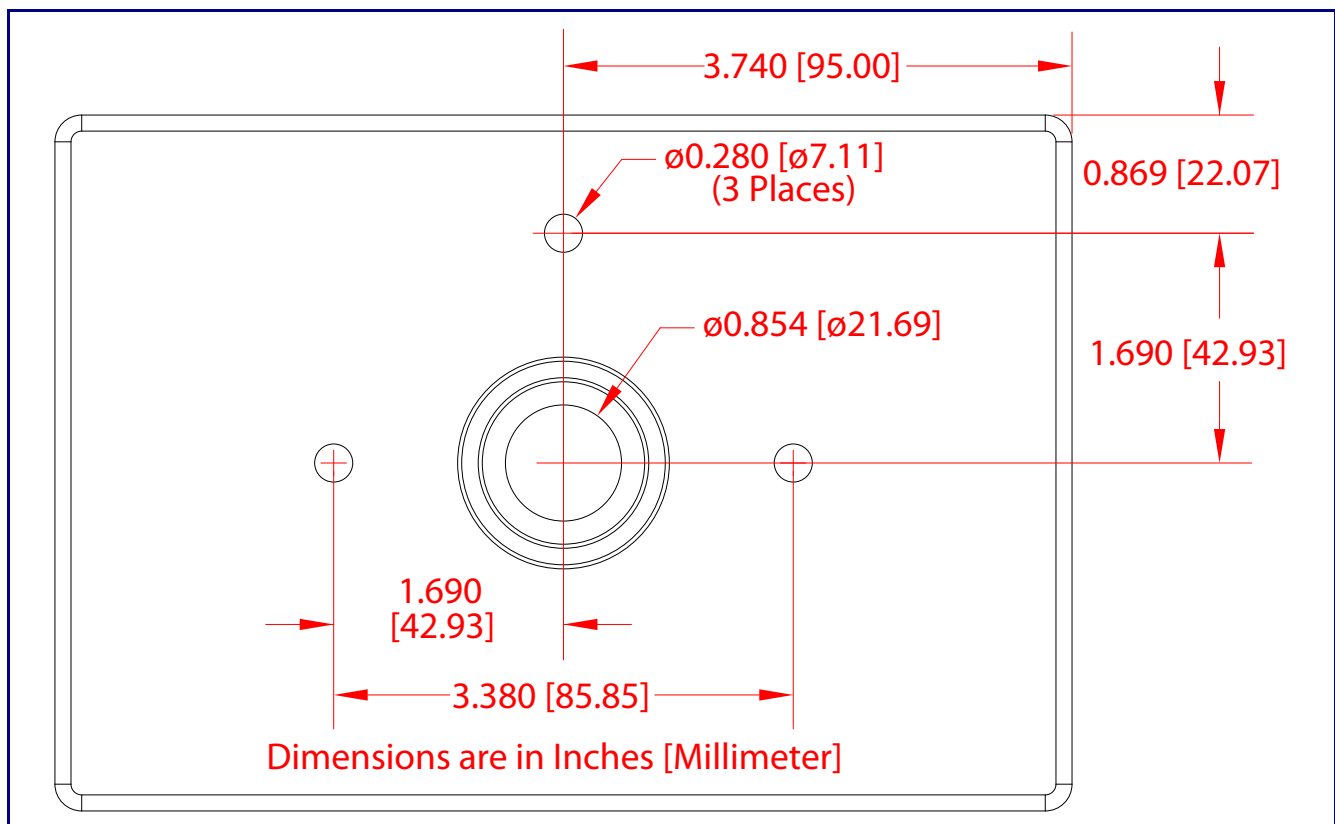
Shroud Dimensions and Mounting Hole Locations
